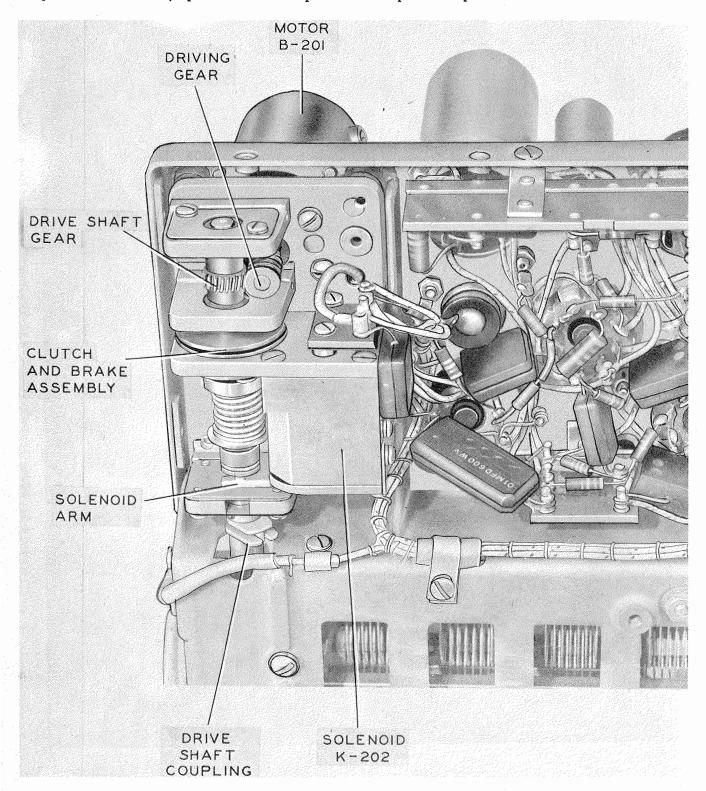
Radio Receiver—Clutch-Brake Mechanism With Worm Gear Housing Removed
